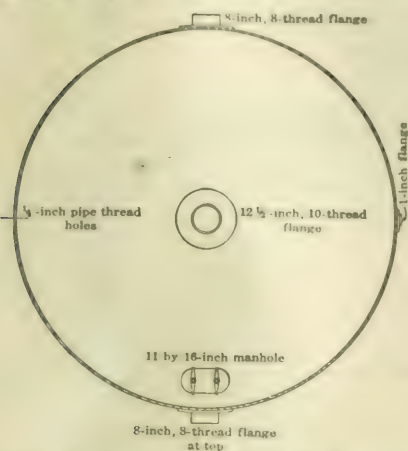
Plan of separating tower, Fuqua topping plant.
